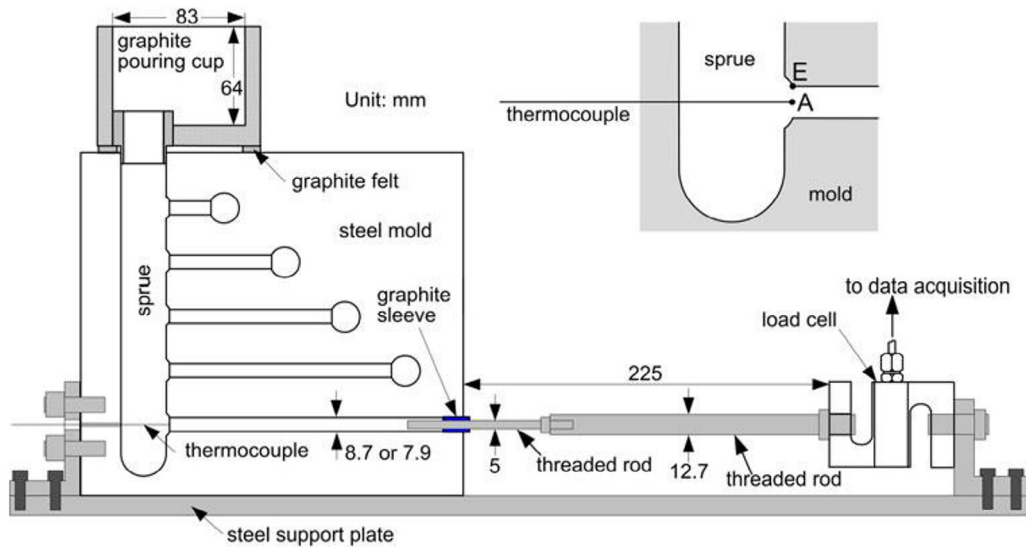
Instrumented CRC mould from Cao and Kou [52].
